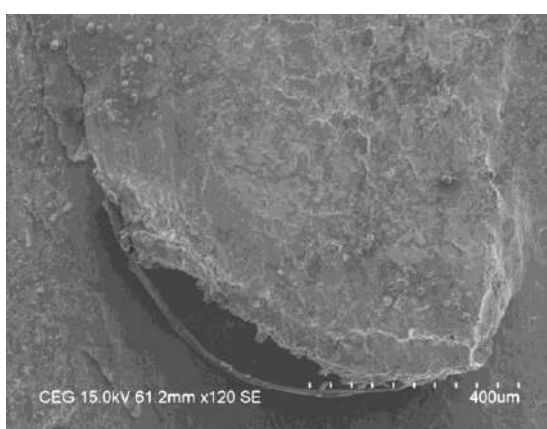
Factography images of the TSFL tested sample welded at weld pressure 3.7kgf.
